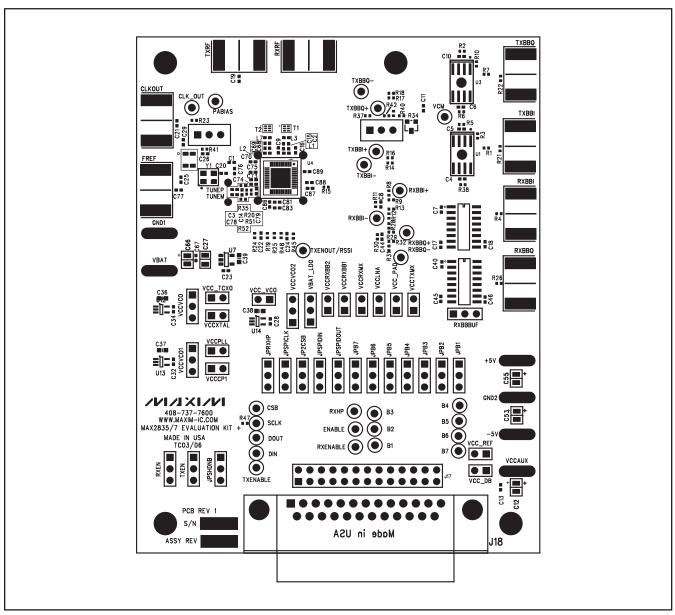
MAX2837 EV Kit PCB Layout—Top Silkscreen
